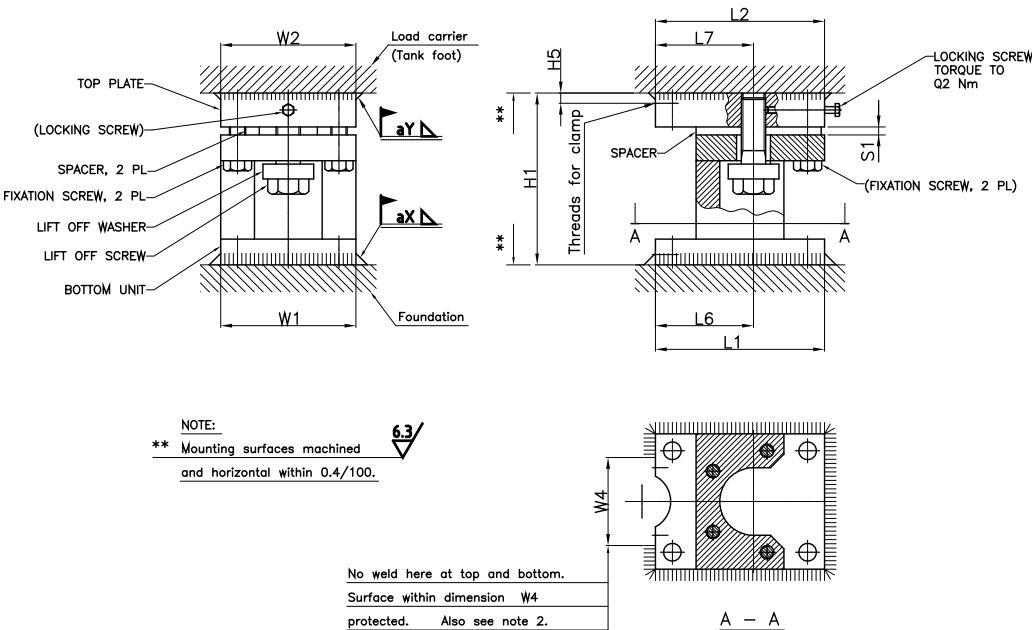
WELDED MODULE FINALLY INSTALLED.
